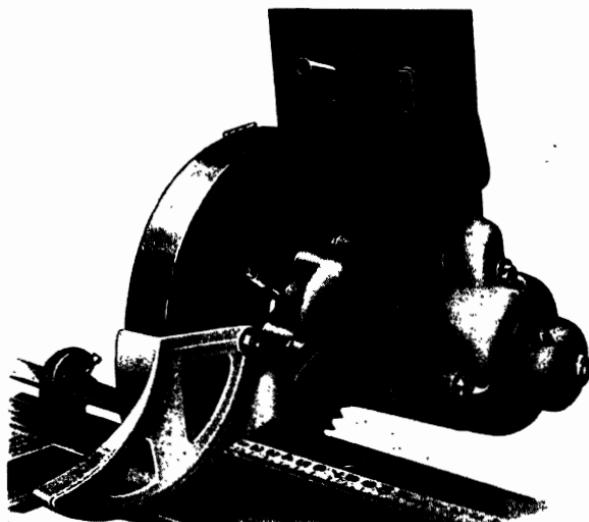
A swing saw with enclosure or hood guard. (Courtesy of the Oliver Machinery Company.)
